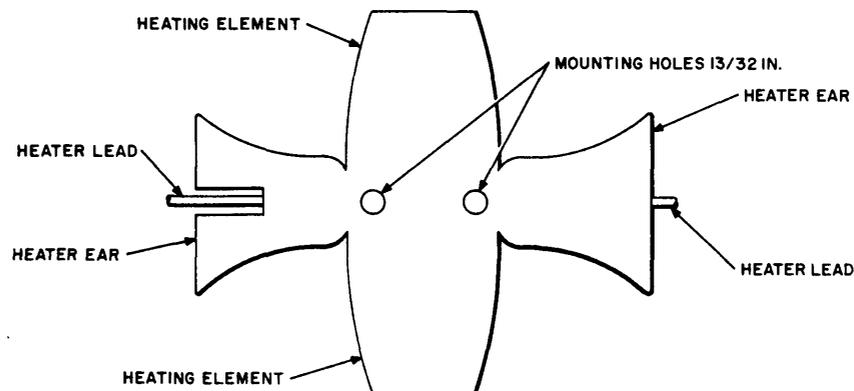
Feed Heater Element (Technical Appliance Corporation)
